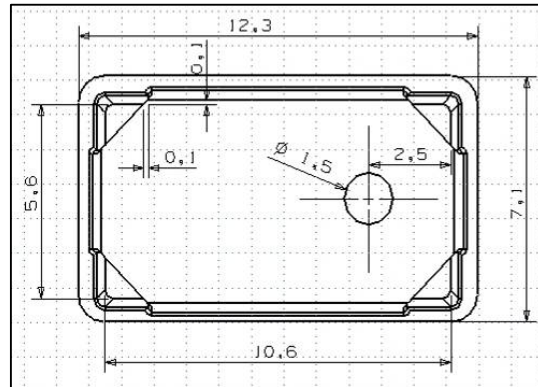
Mechanical drawing: Underside of tube connection (type A and type B)
